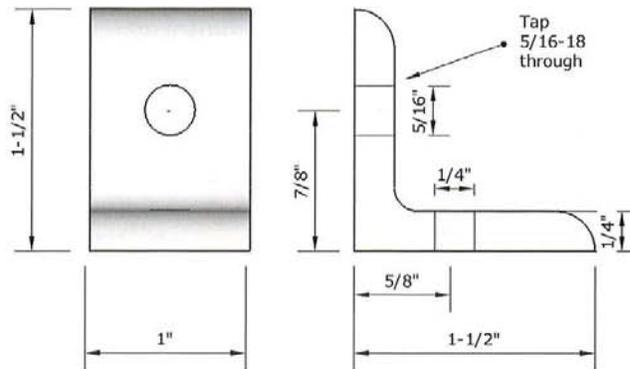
Dimensions for the aluminum angle brackets that clamp the shield to the lathe bed
